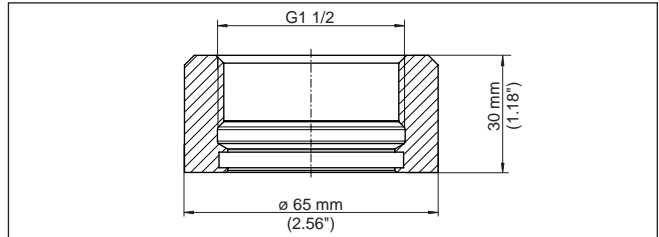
Dimensions of welded socket, thread G1½ (ISO 228-1) - Hygienic design
